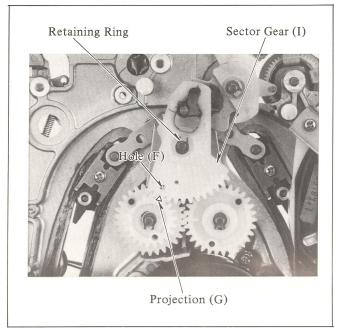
Assembly and Adjustment of Gears and Rods-(4)
